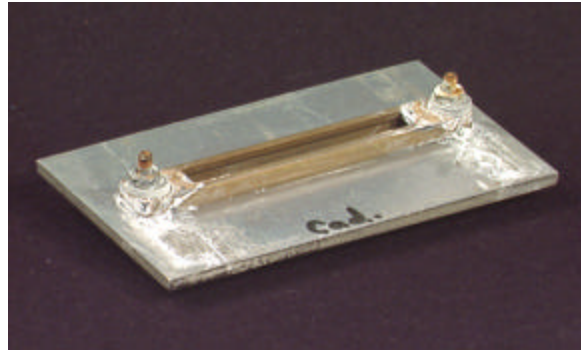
Cadmium-plated connector assembly after salt fog exposure
